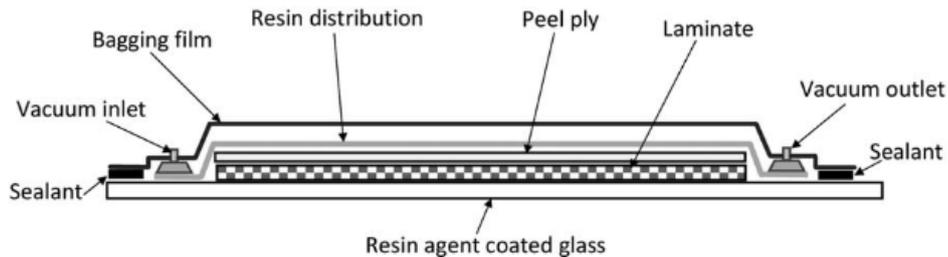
Schematic illustration of vacuum assisted resin transfer molding [11]
